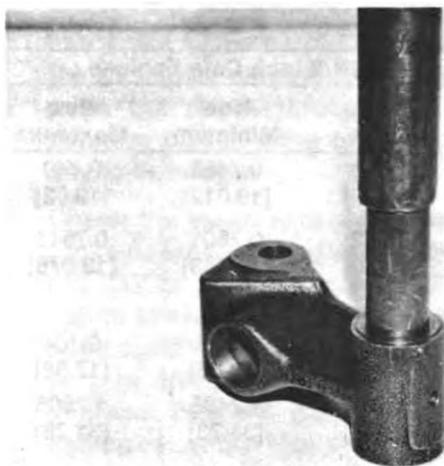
(N10403). Remove The Bushing From The Cam Follower.
